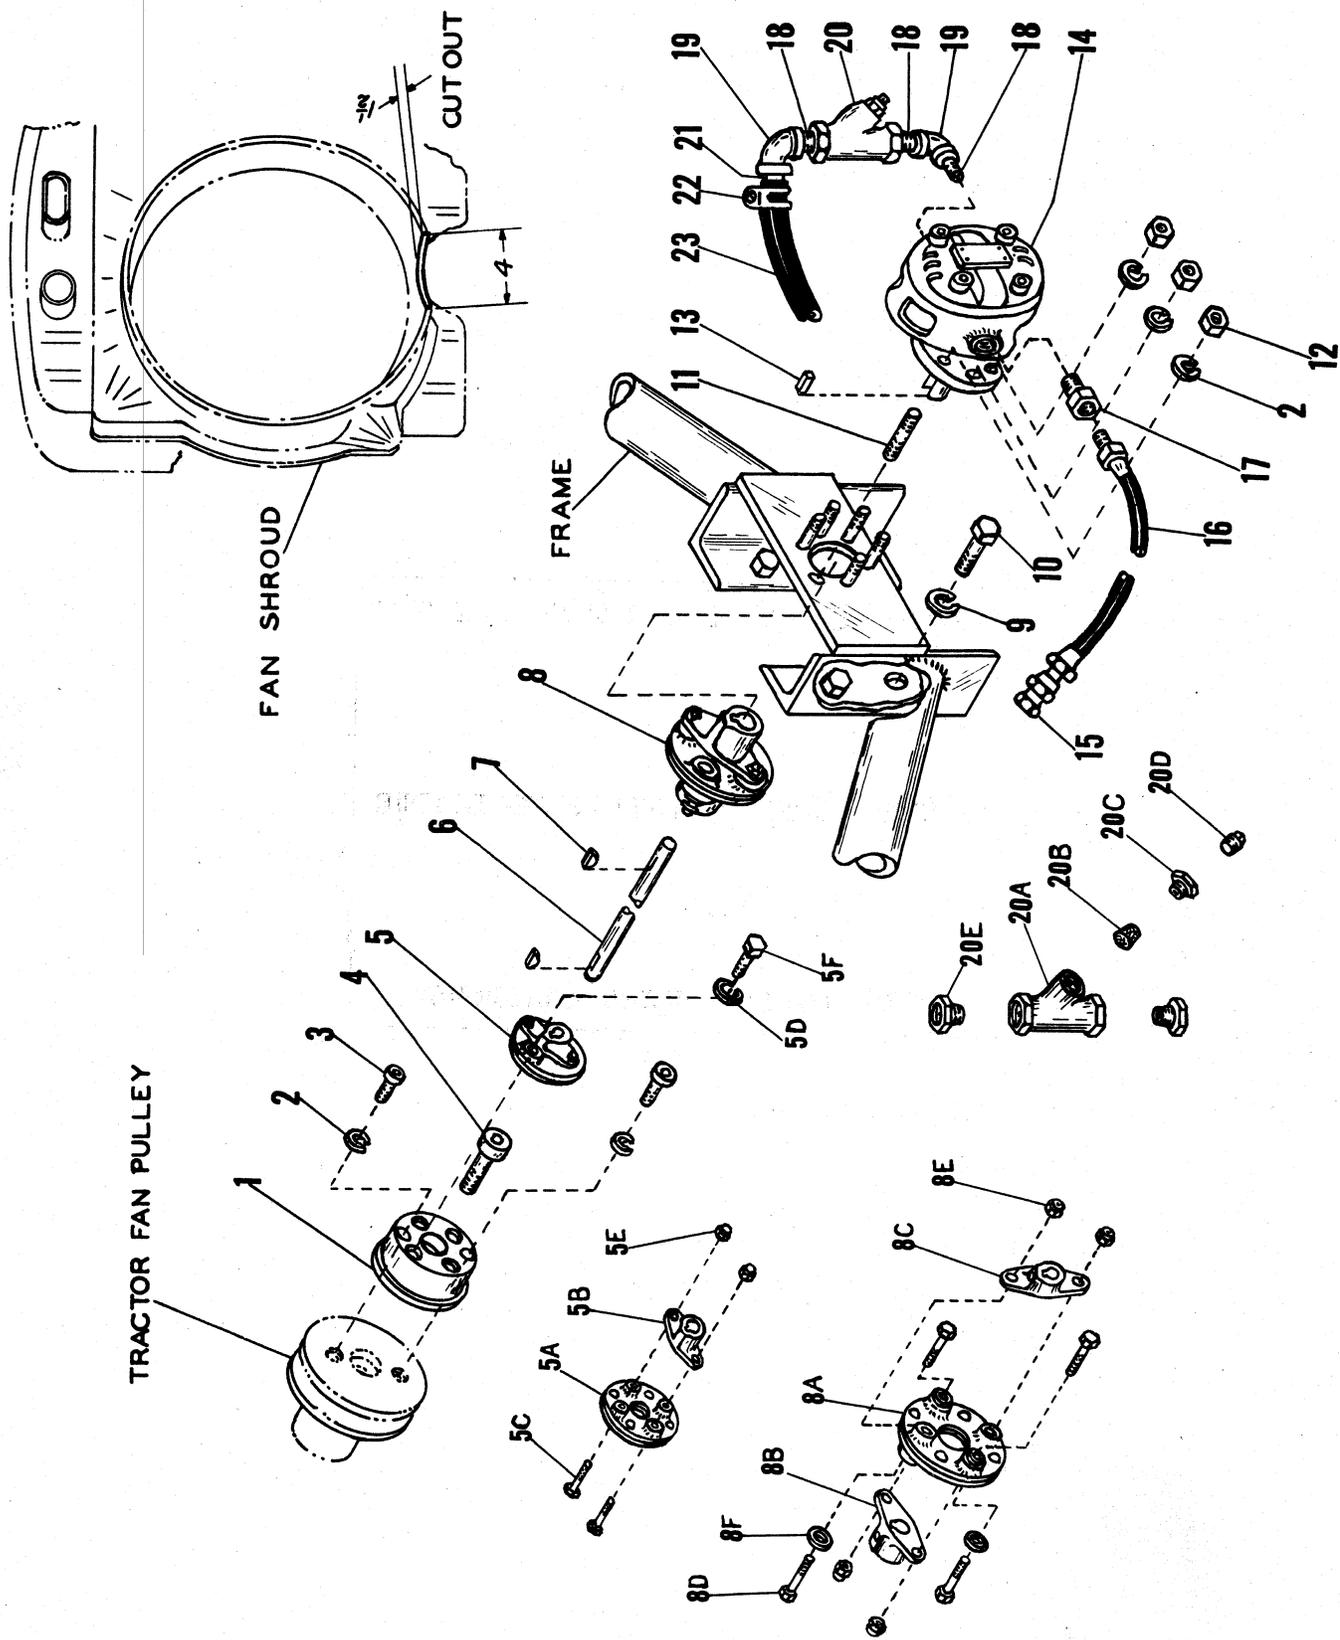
, Wagner W7 Hydraulic Loader Front Mounting and Drive Assembly Installation for Fordson Major Tractor
